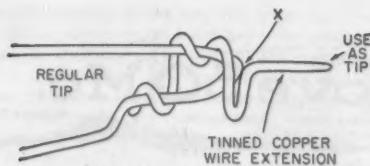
Sketch showing how W5CYF extends the usefulness of a soldering gun by extending the length of the tip.
